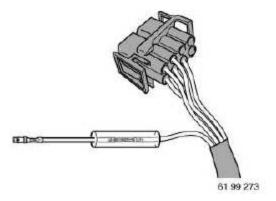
Identifying Shrink-On Sleeve Over Butt Connector
